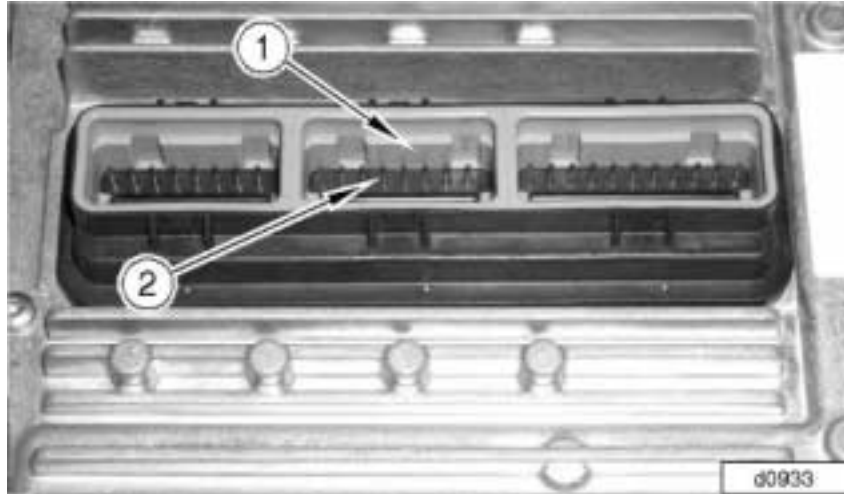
Inspecting the Rubber Seals and the Connecting Pins
